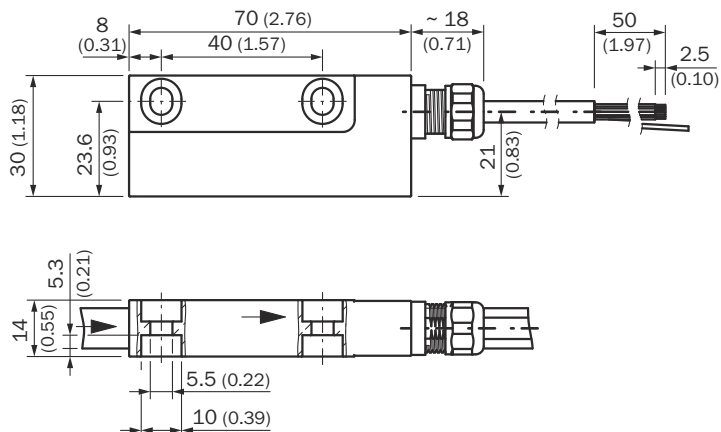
TTK70S dimensional drawing with cable outlet (all dimensions in mm)
